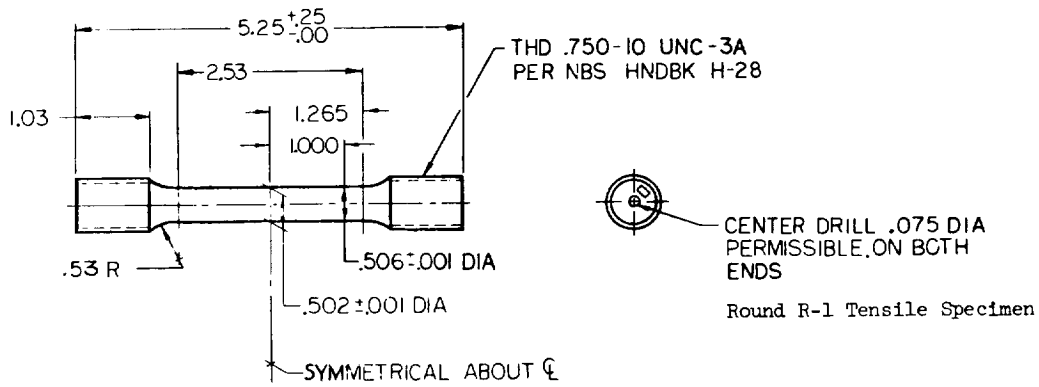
Tensile Test Specimens Used for Forging and Welded Ring Evaluation
